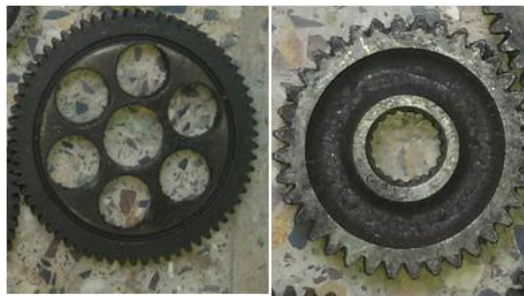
Driven Gears, Figure 3: Driver Gear
